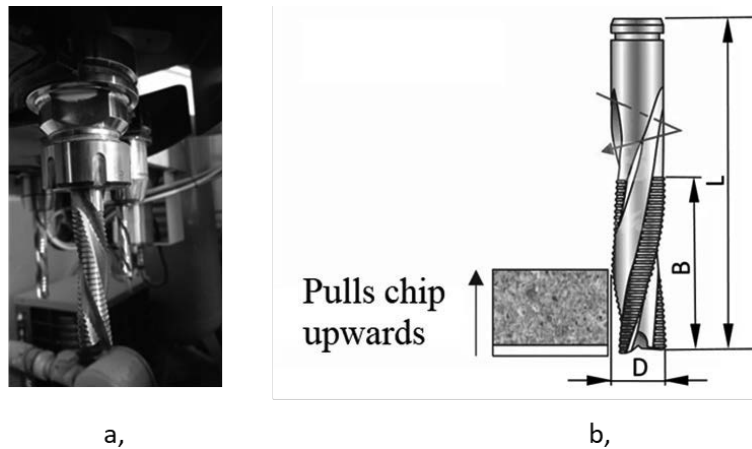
Roughing tool (a.); Diagram of the positive roughing cutter tool,  $D$  – tool diameter,  $B$  – tool working length,  $L$  – tool length (b,) (www.freudtools.com)
